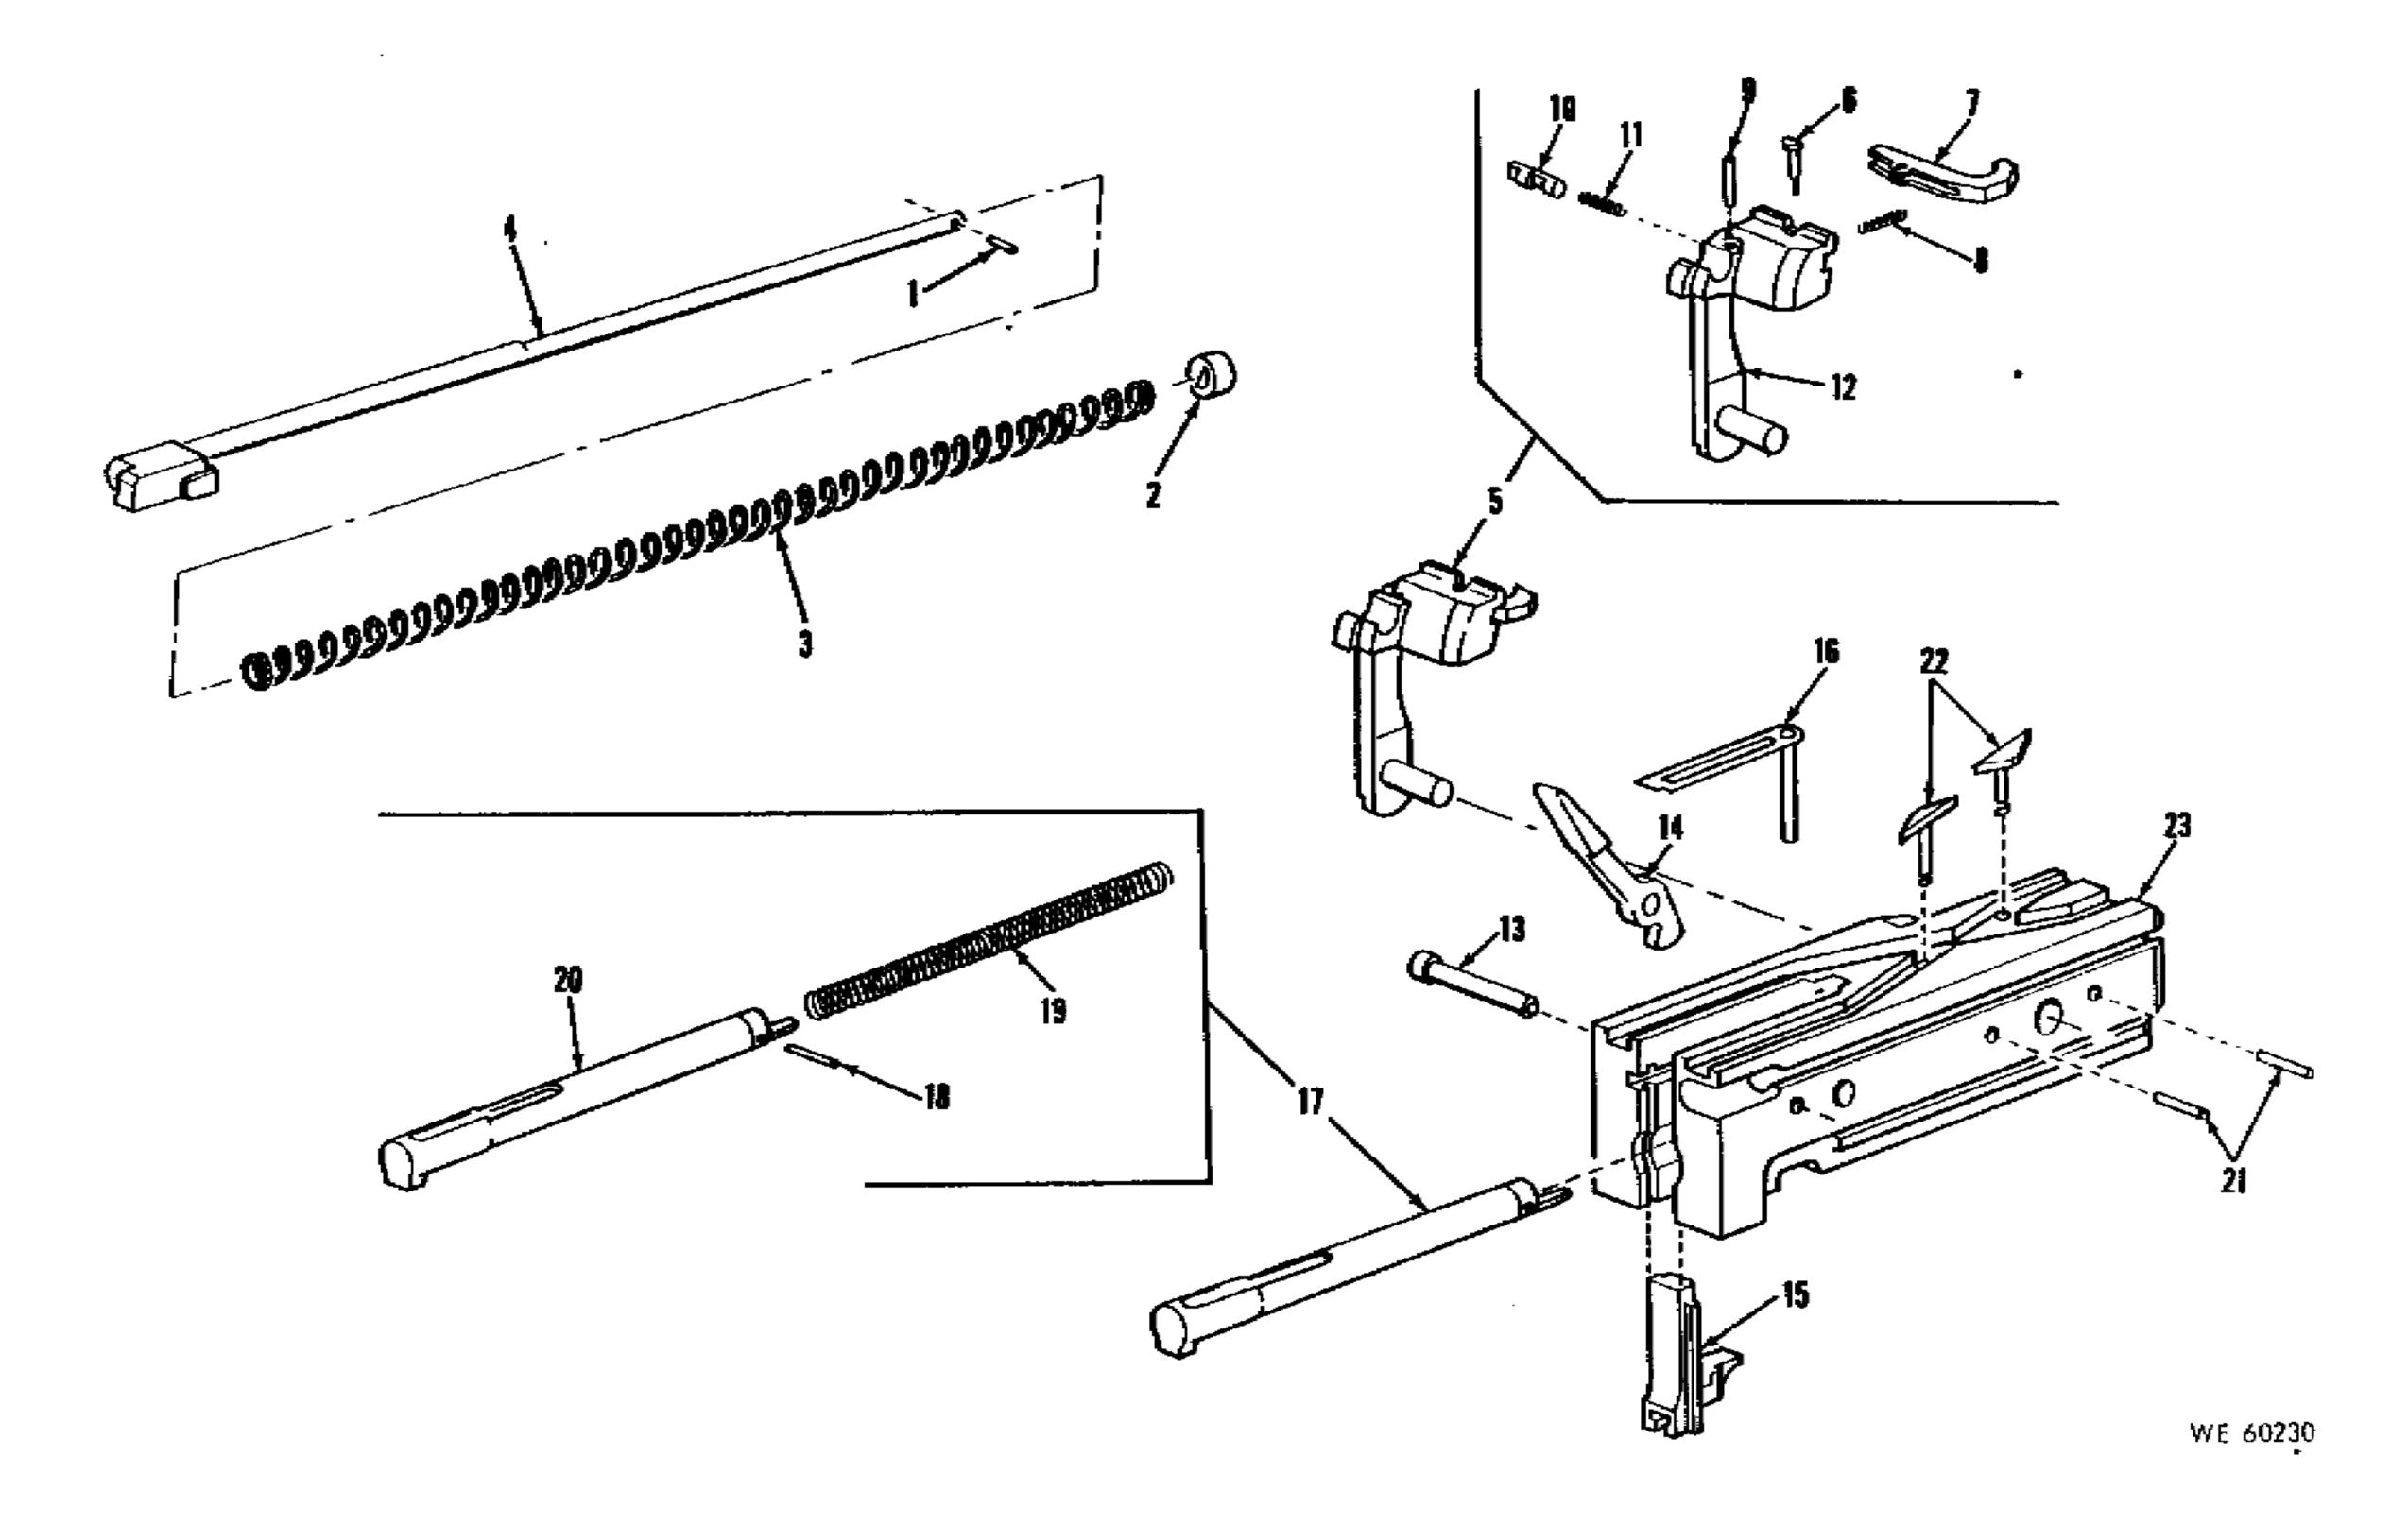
Driving spring assembly and bolt group for Caliber .30 Machine Gun, M37 only—exploded view.
